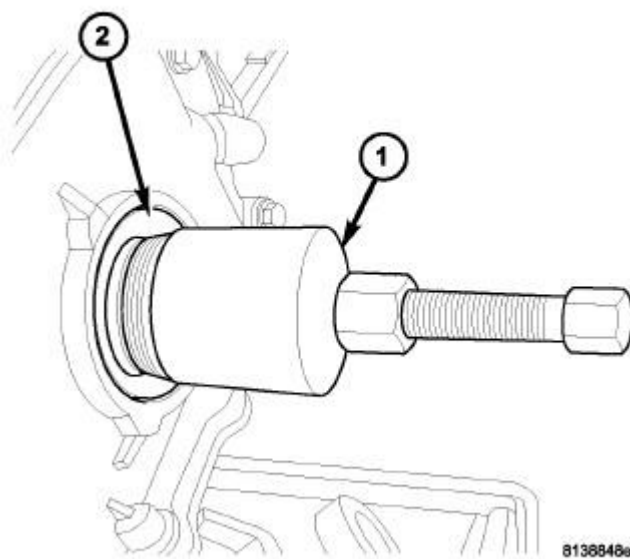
FRONT CRANKSHAFT SEAL REMOVAL
